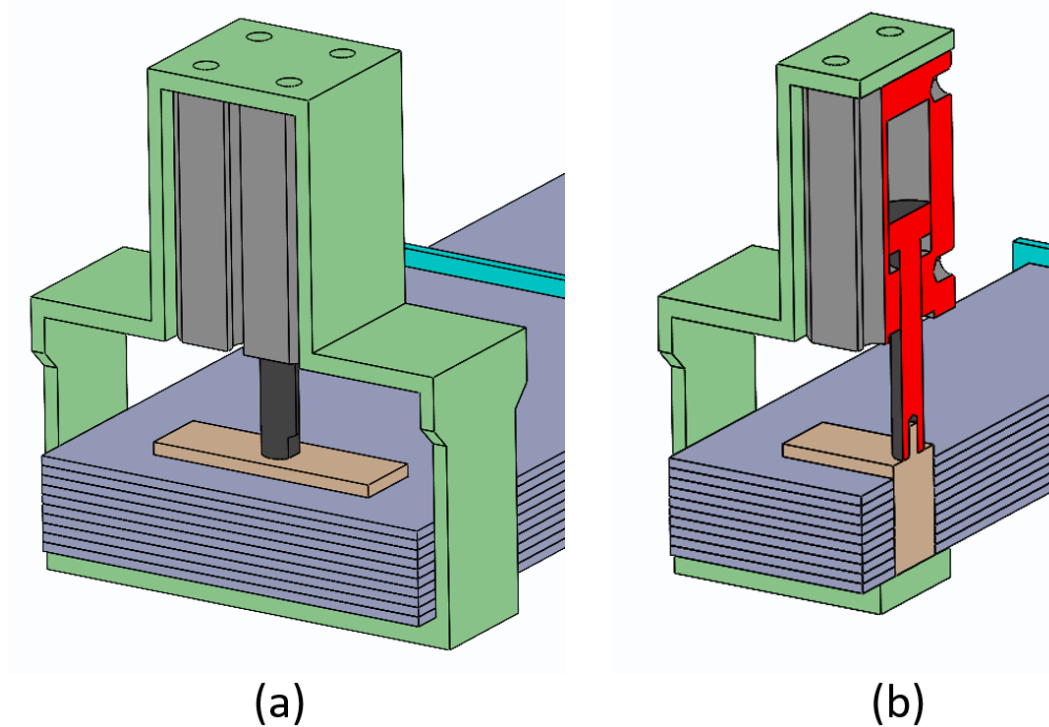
LJ with Straight pin. (a) Straight pin inside the laminar jamming structure. (b) Longitudinal cross section of the LJ with straight pin.
